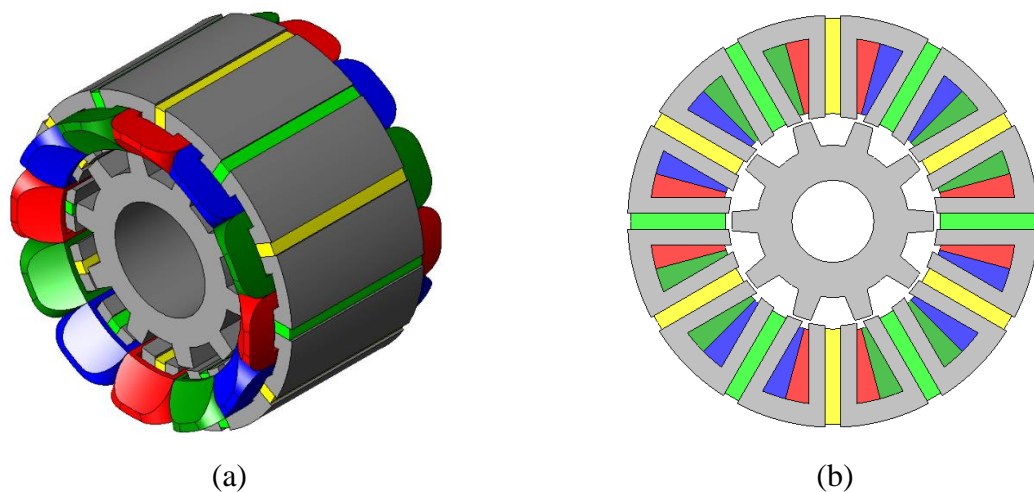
Geometry of conventional 12/10 FSPM machine (a) 3D isometric view (b) Section view [117]
